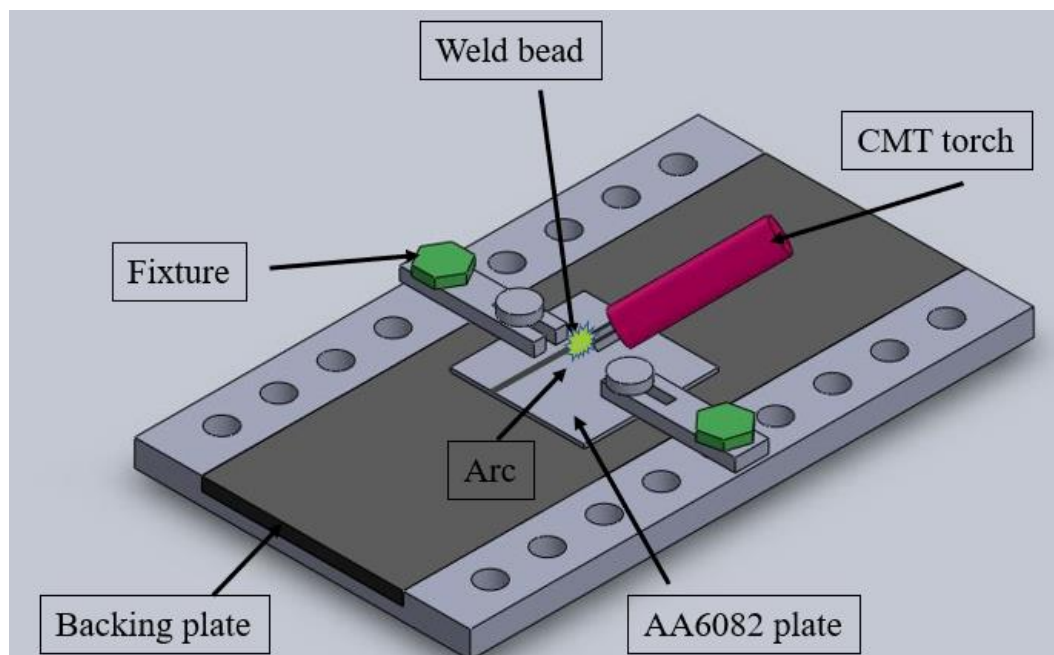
Schematic diagram of a fixture holding an AA6082 plate.
